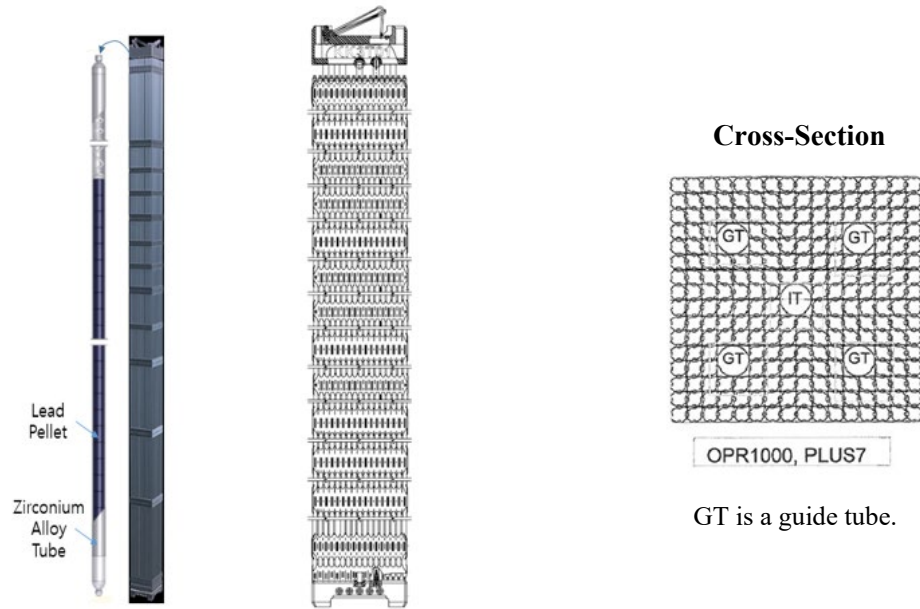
KNF's 16 x 16 CE PLUS7 surrogate assembly.
